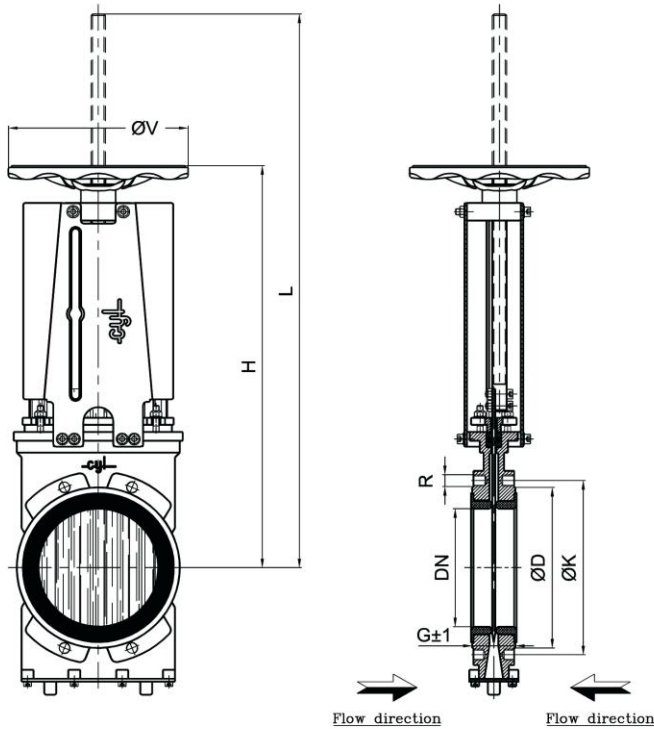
KGV SK series semi lugged rising stem with handwheel & gearbox
